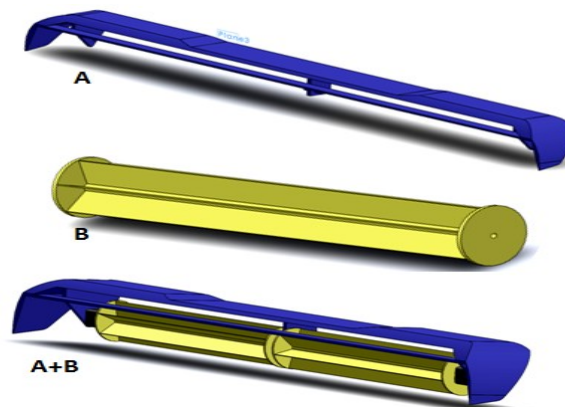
A. Car spoiler; B. Wind turbine; A+B Wind turbine fixed inside the spoiler.
